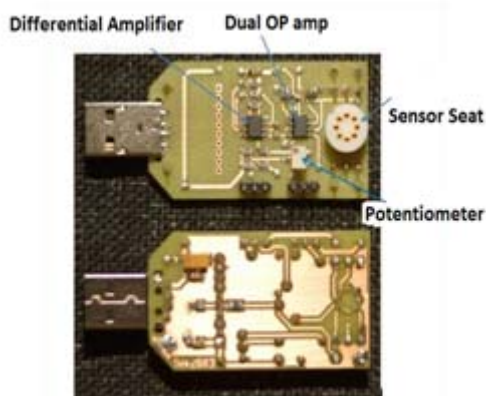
Final PCB for the sensor interface circuitry (display not present)
